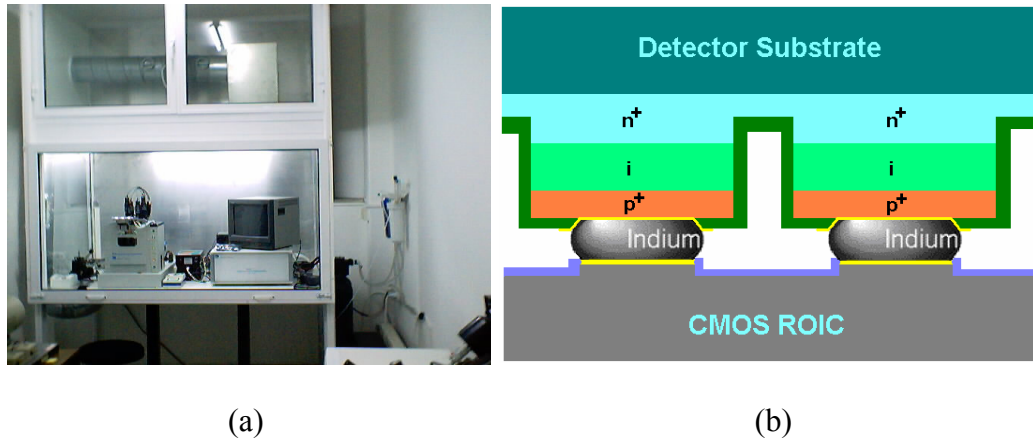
(a) RD Automation M8-AN model flip-chip aligner bonder installed in the laboratory, and (b) Illustration of the cross section of FPA-ROIC assembly after flip-chip bonding.
